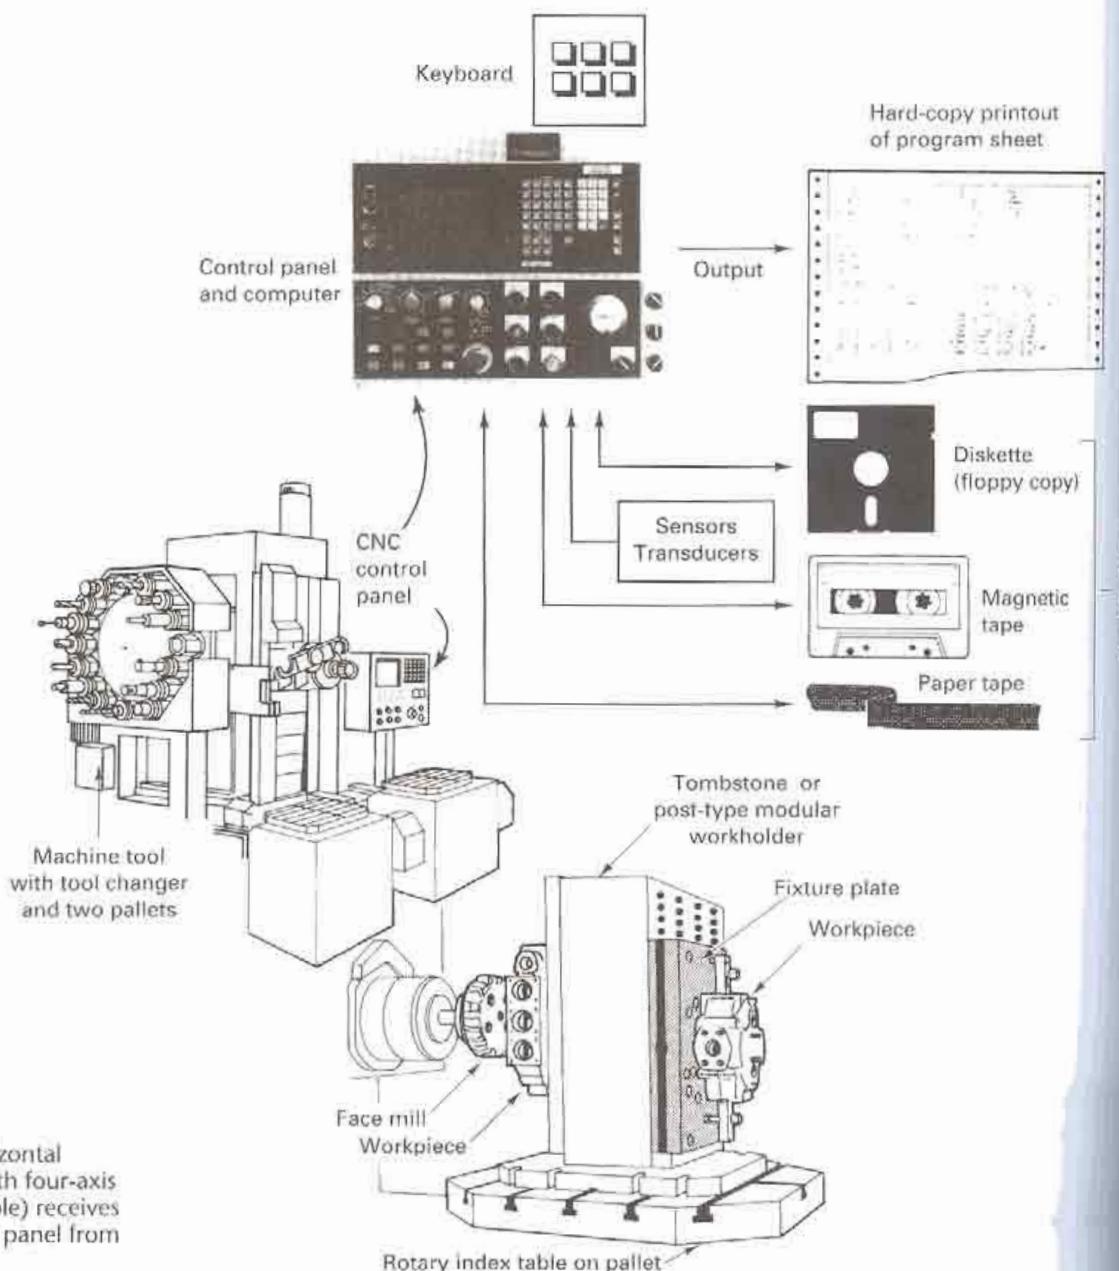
Horizontal machining center with four-axis control (X , Y , Z , R table) receives inputs to the control panel from many sources.
